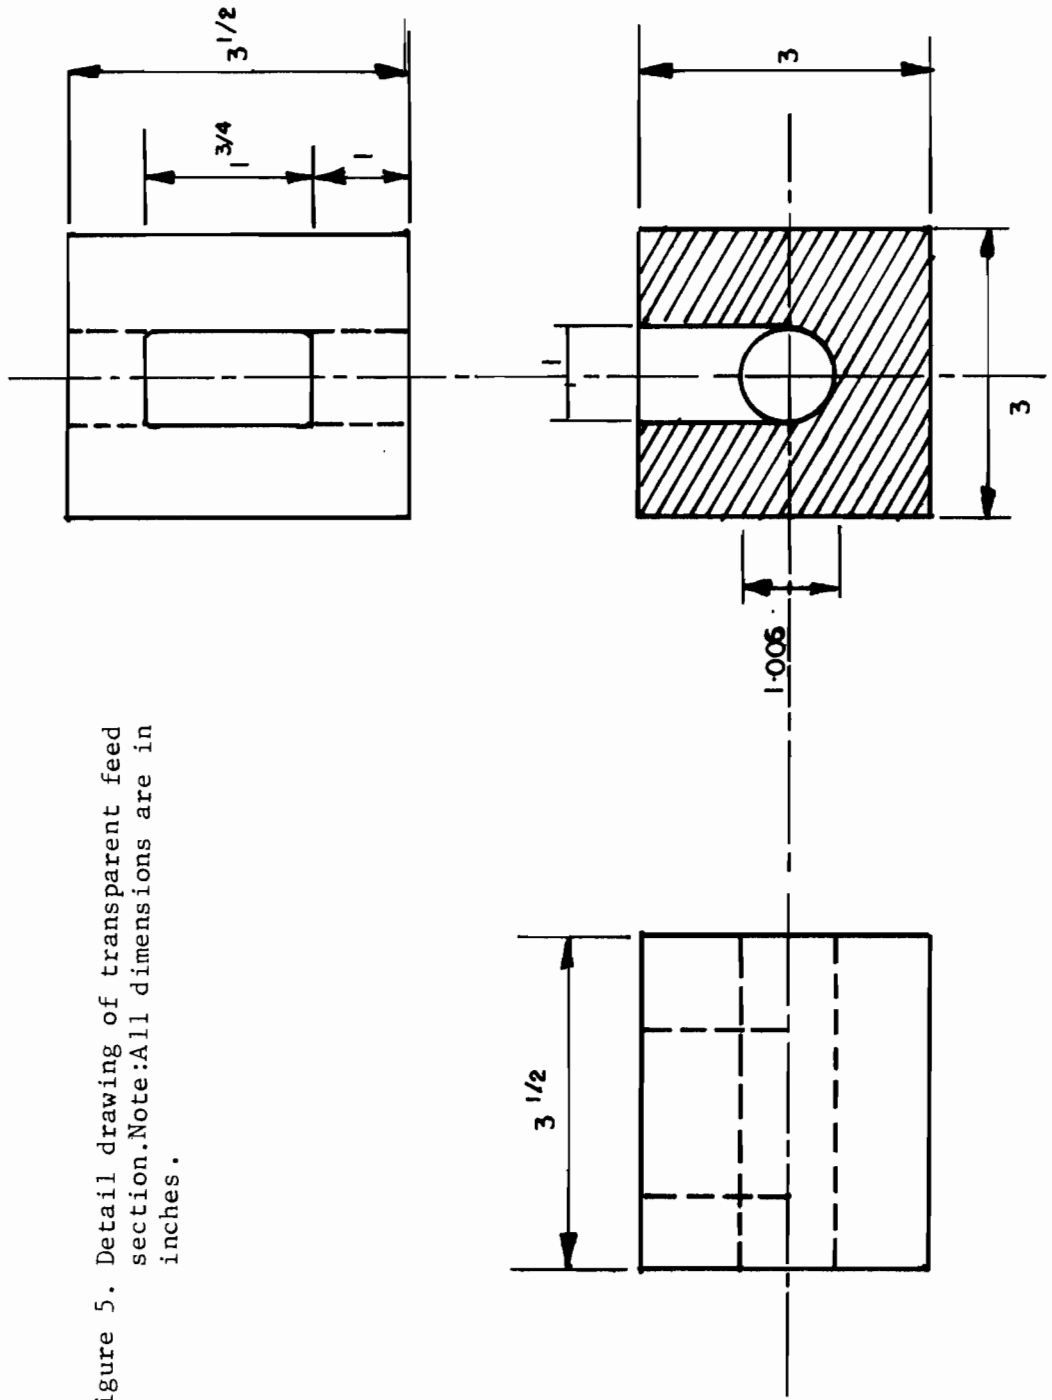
Detail drawing of transparent feed section. Note: All dimensions are in inches.
